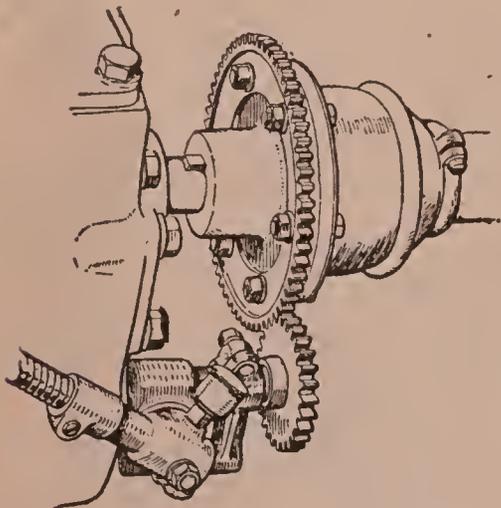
Speedometer Drive from the Main Shaft Instead of the Front Wheel (Cole Car).
